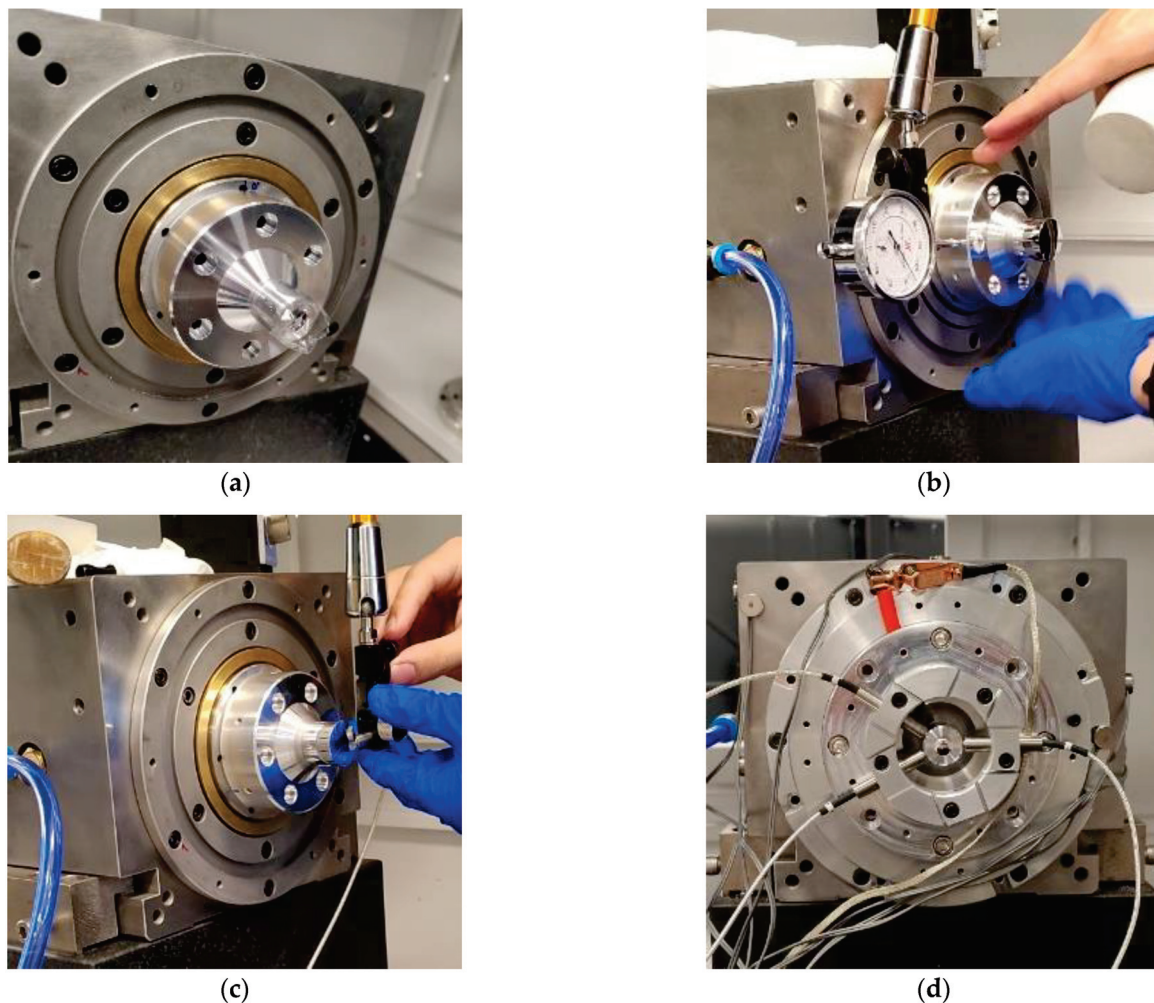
Detailed steps of radial error measurement using three-point method: (a) step 1: mounting of standard workpiece, (b) step 2: rough adjustment of standard workpiece, (c) step 3: fine adjustment of standard workpiece, (d) step 4: mounting fixture and sensor probes.
